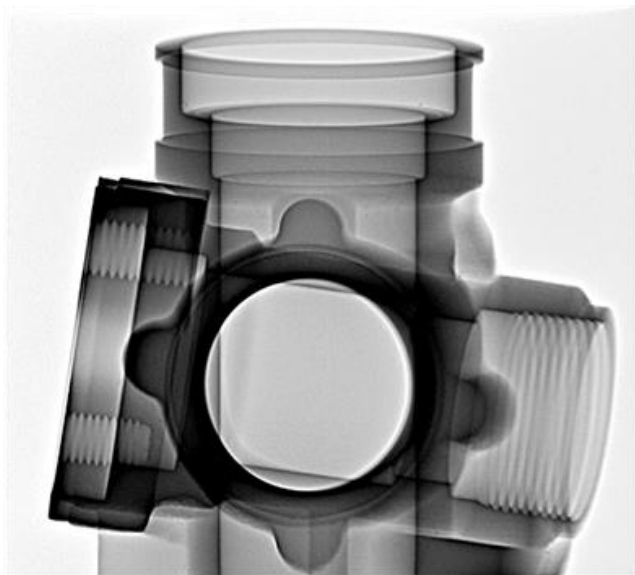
X-ray image of steering gear housing fabricated by SLM method
